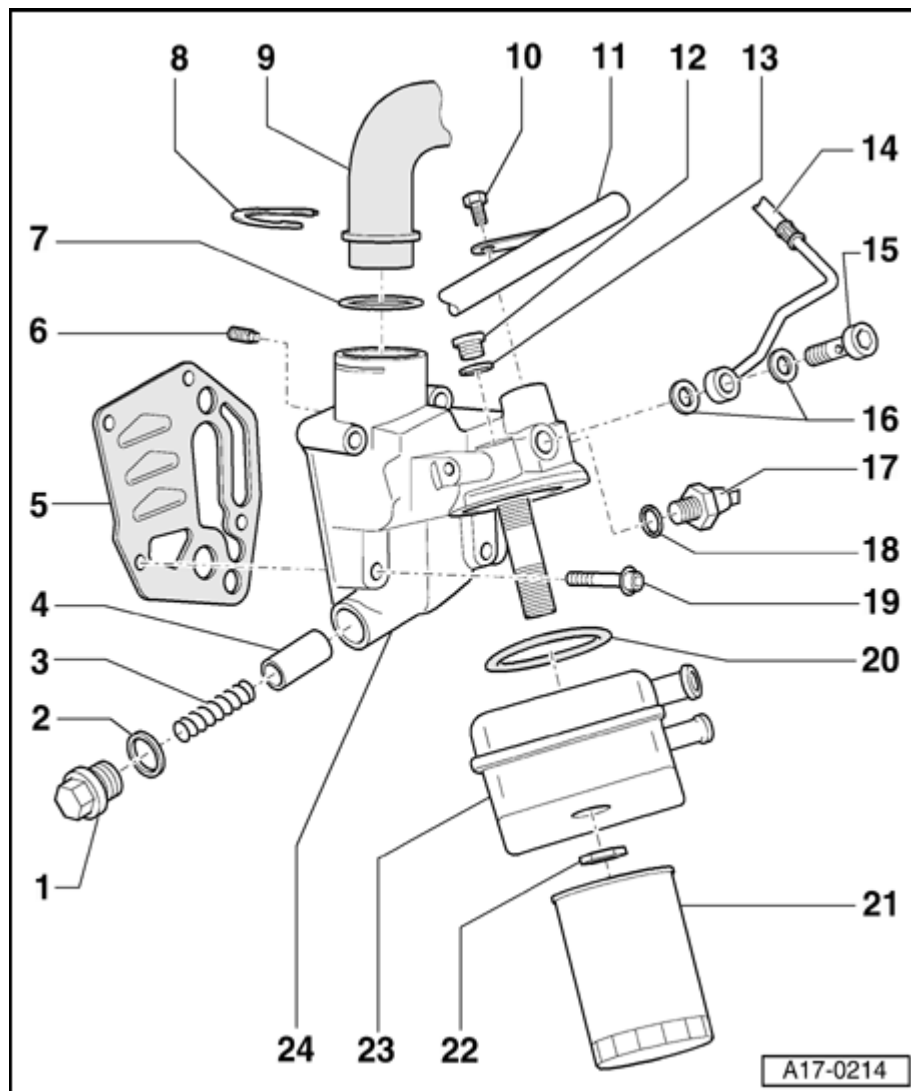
Lubrication System Components, Removing And Installing - Part II
